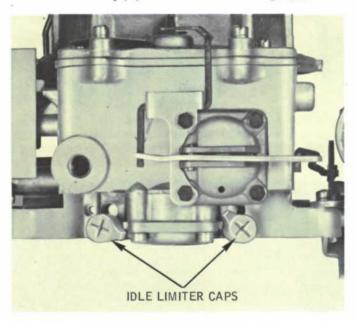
Idle Fuel Mixture Limiter Caps — Autolite Carburetors
